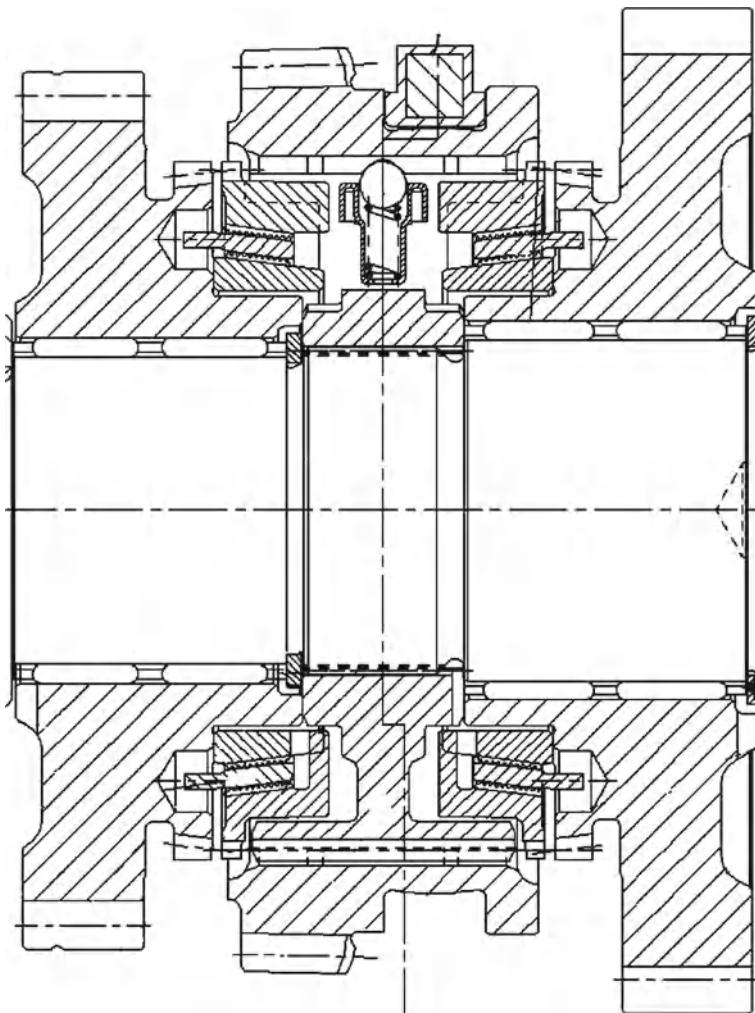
Cross section of a double cone synchronizer (from Genta and Morello 2009)
